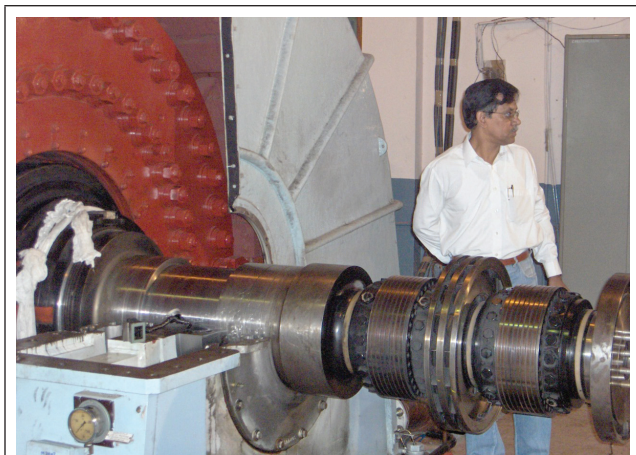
Sh. G. SENGUPTA, AD, INSPECTION OF BEARING
